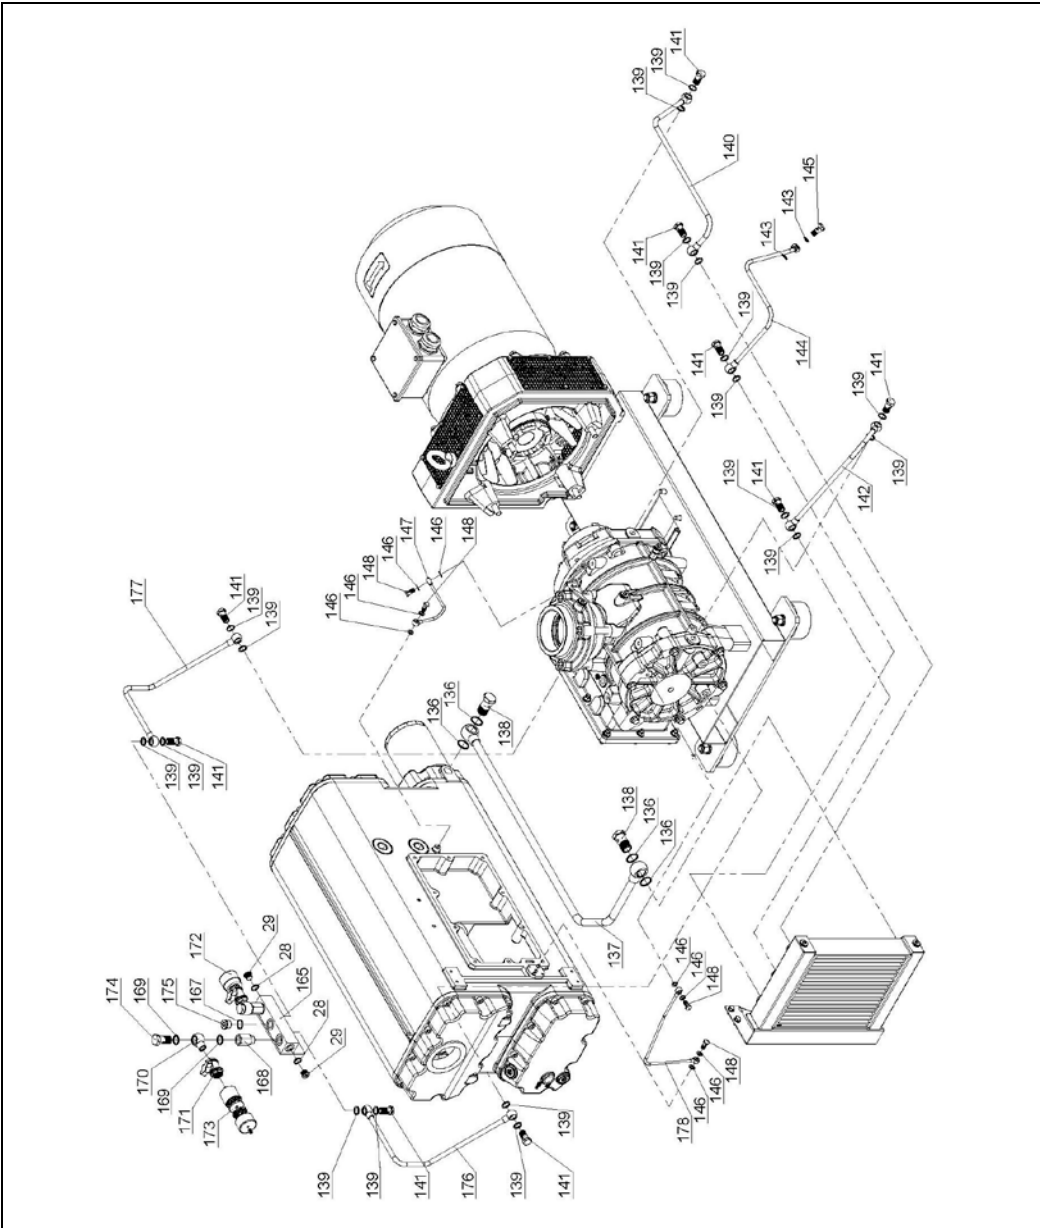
MS-631 Pump parts – Exploded View (2 of 4)
